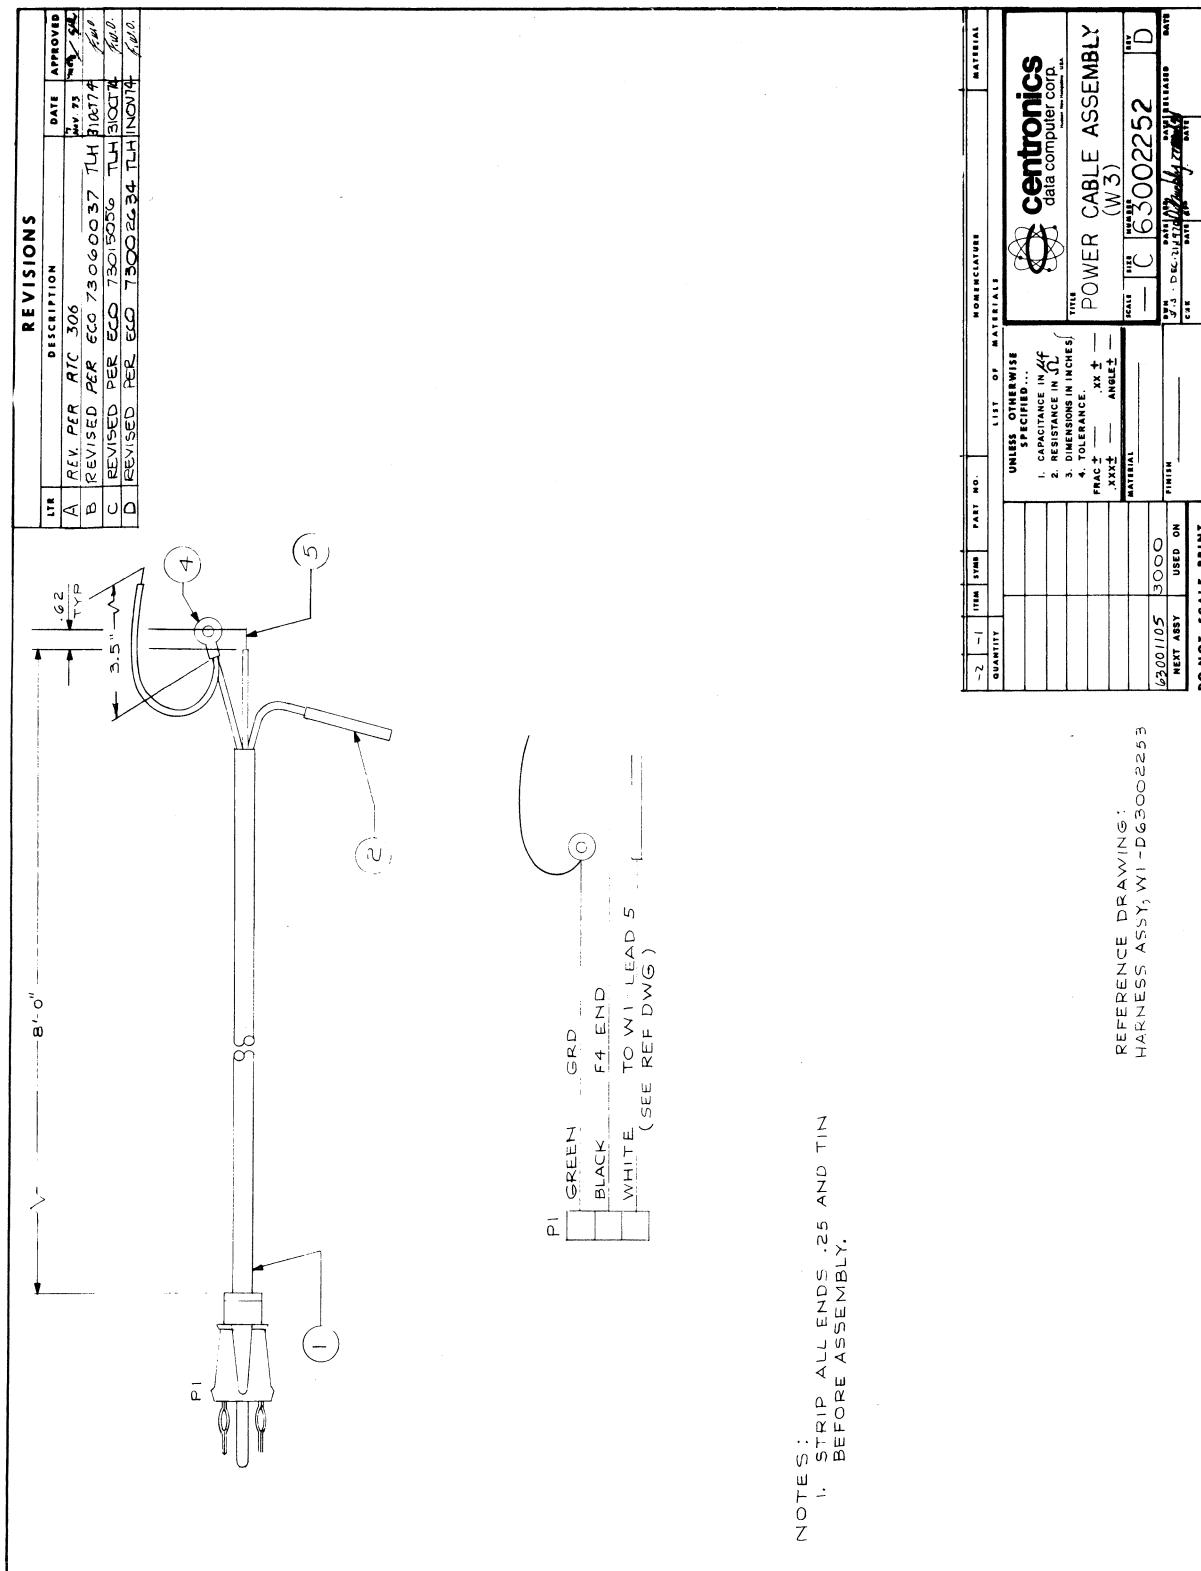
POWER CABLE ASSEMBLY (W3)
